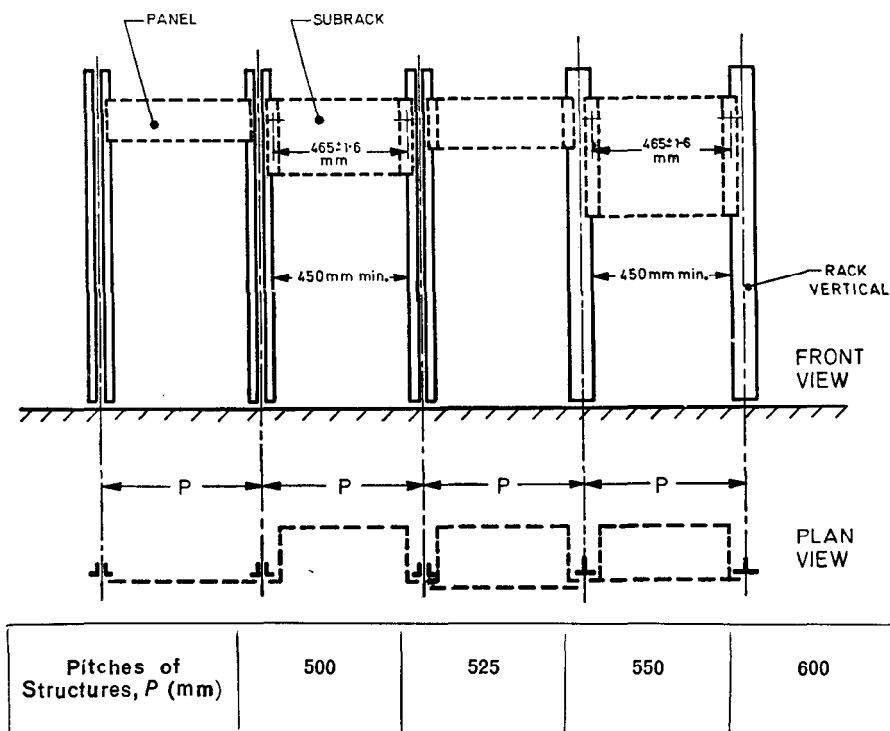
PITCHES OF FIXED RACK STRUCTURES
